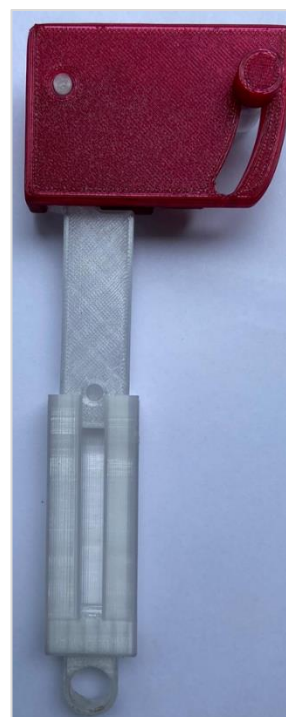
Mandible Support and Shoulder-Mandible Element Assembly
